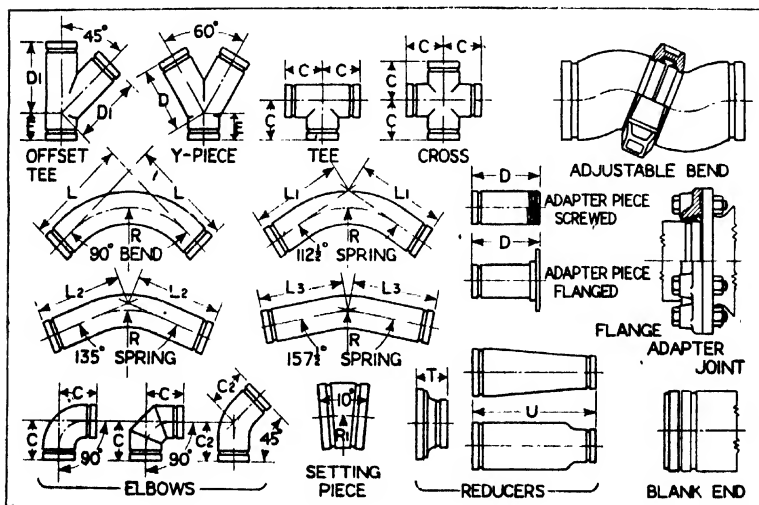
VICTAULIC FITTINGS FOR GROOVED TUBES
